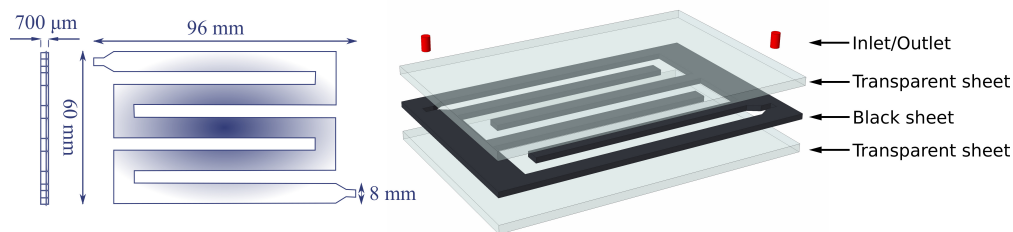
Drawing of the manufactured microreactor with specified dimensions.
